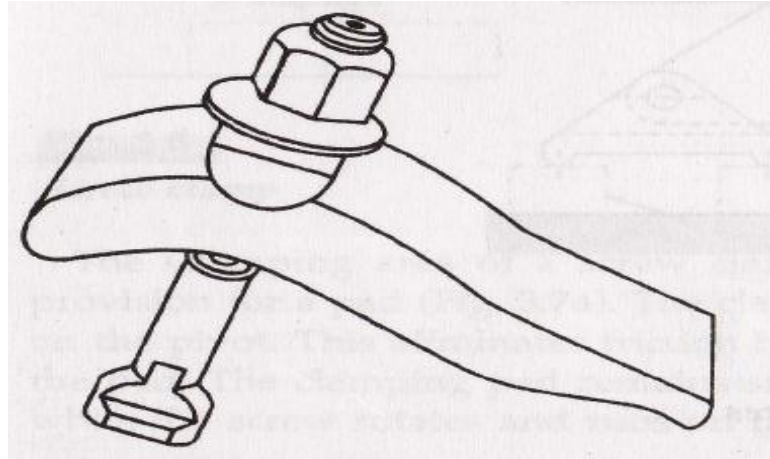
Universal clamp with cylindrical washer (Jigs and Fixture, P H Joshi, 2001)
